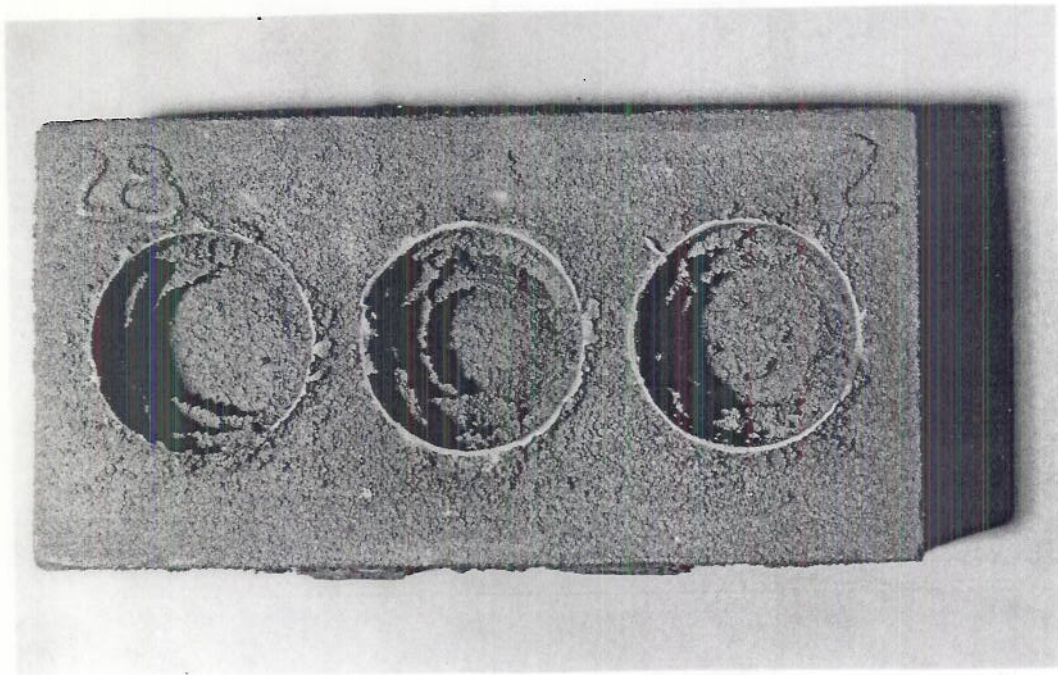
CASTING FROM SAME HEAT, COOLED OVERNIGHT IN THE MOLD.
